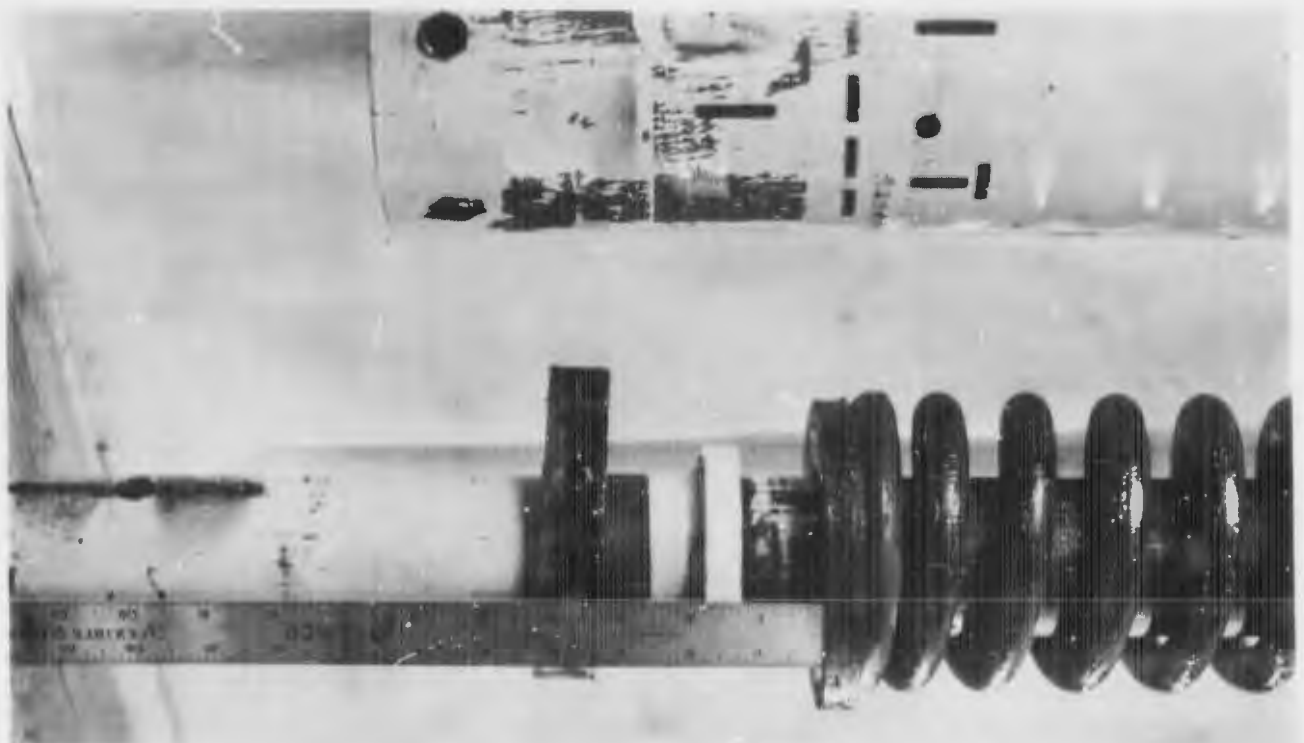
Type I, S/N 26, Close-Up of Permanent Set in Spring after Testing
